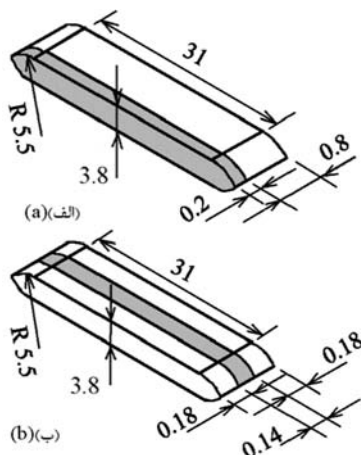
Test specimens; (a) two layered sheet (b) three layered sheet
